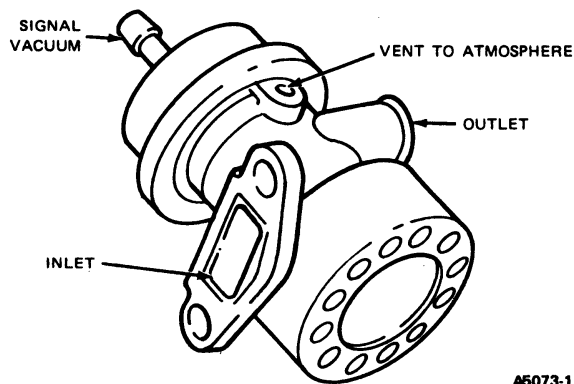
Normally Closed Pump Mounted Air By-Pass Valve with EGR Air Pressure Tap
